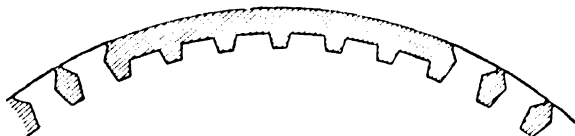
Rotor of a reluctance motor (die-cast aluminum.)
